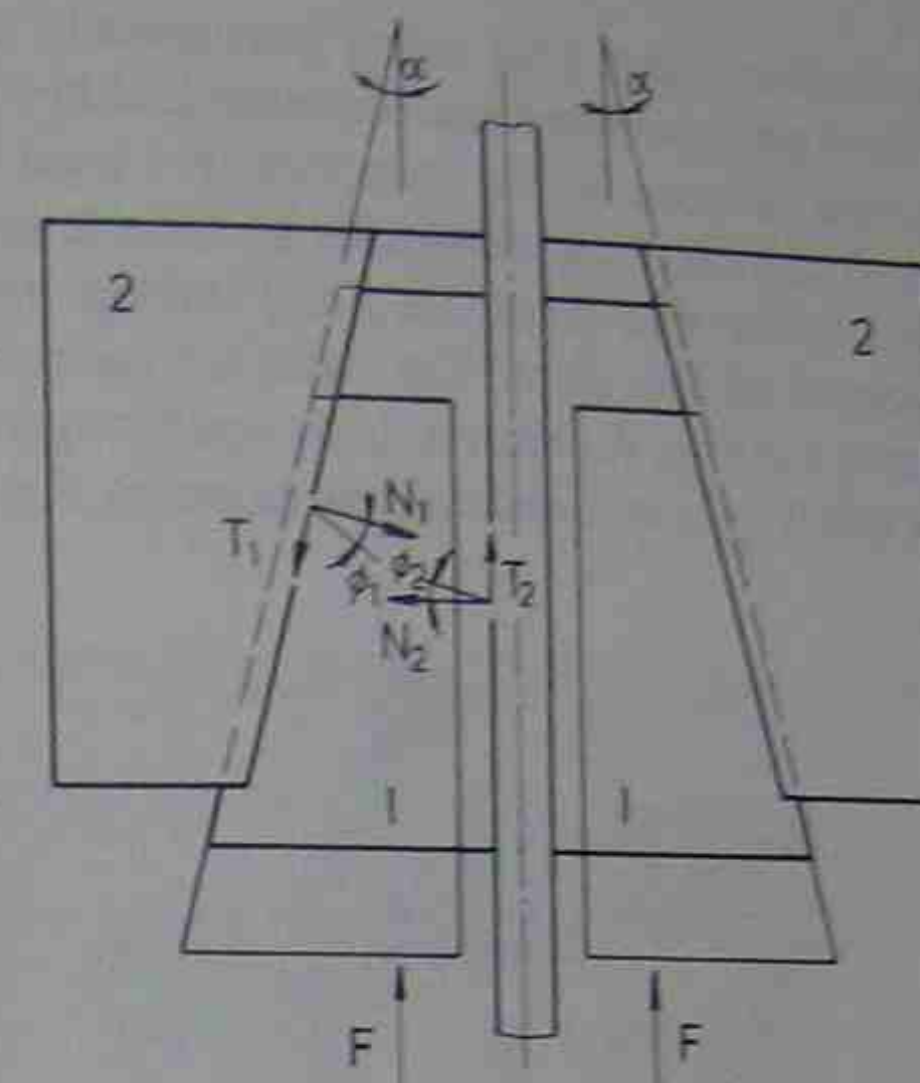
Diagram of safety gear block with wedge-shaped jaws. 1. Jaws; 2. Safety gear block.
